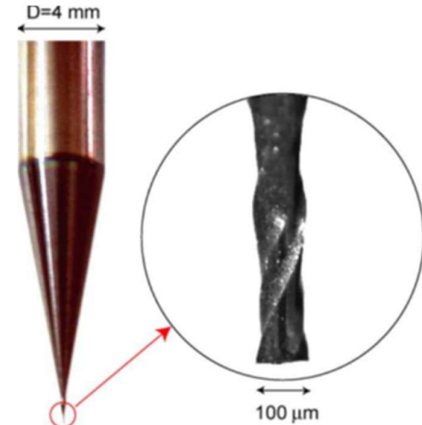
Tungsten Carbide micro-end mill with 2 flutes [2].
